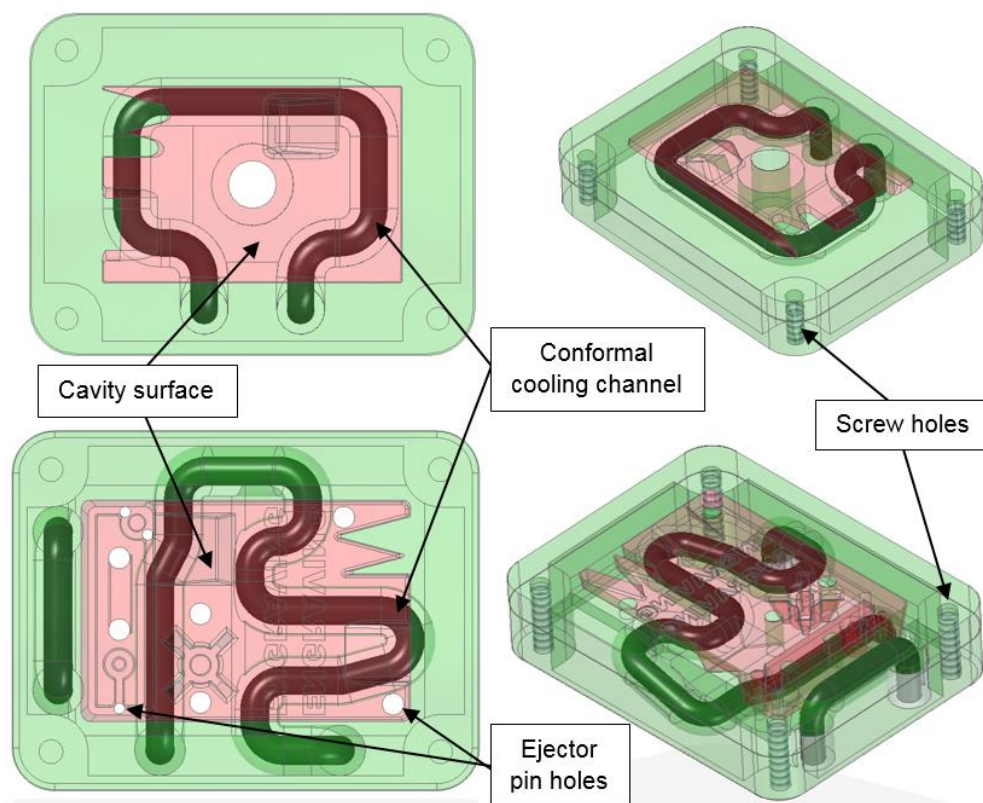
Layout of the conformal cooling channels avoiding mould features such as screw and ejector pin holes.
